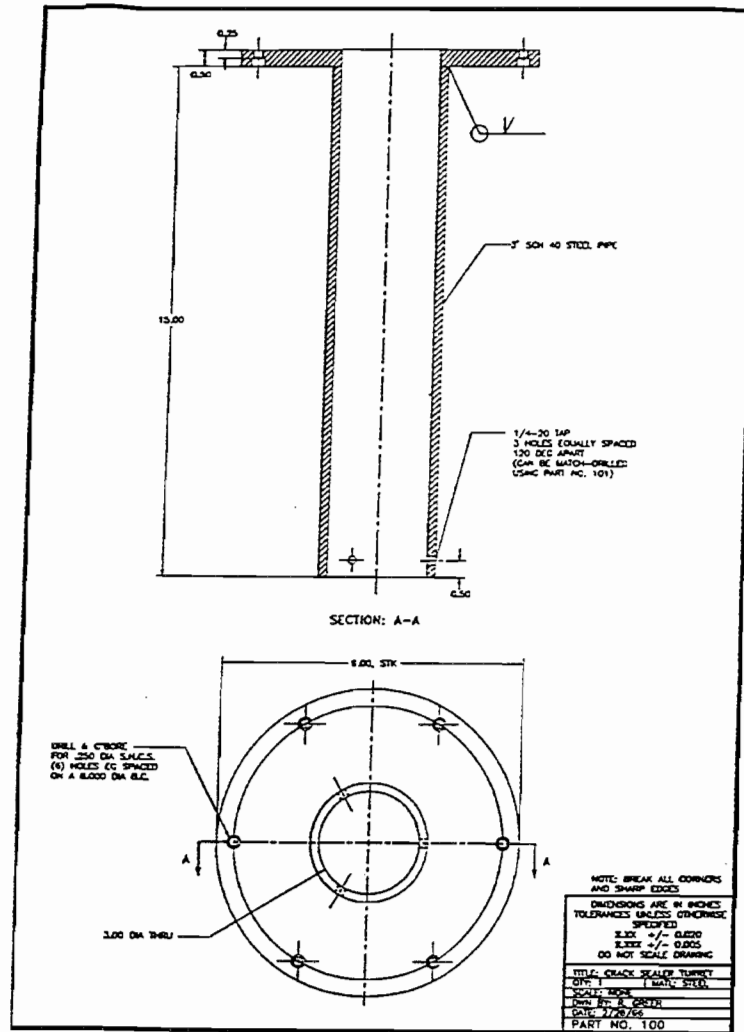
Turret Drawings -Manufactured by the Automated Construction Laboratory
